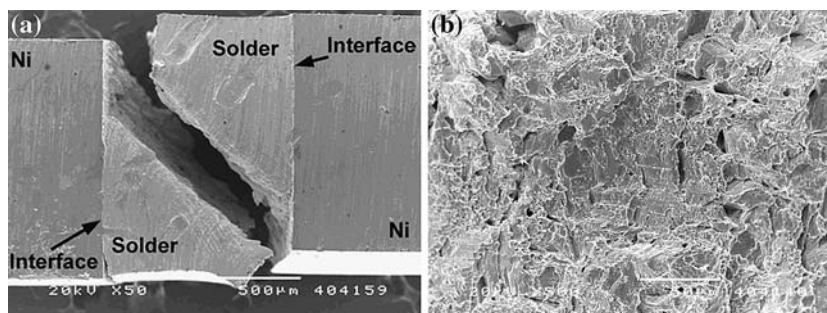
Failure path and fracture surface of as-soldered Sn-3.5Ag/Ni-P specimens. (a) Cross-sectional view of the entire fracture joint. Note that necking has occurred in the bulk solder. (b) Quasi-cleavage fracture viewed from the fractured surface. The scale bar is 50 μm .
